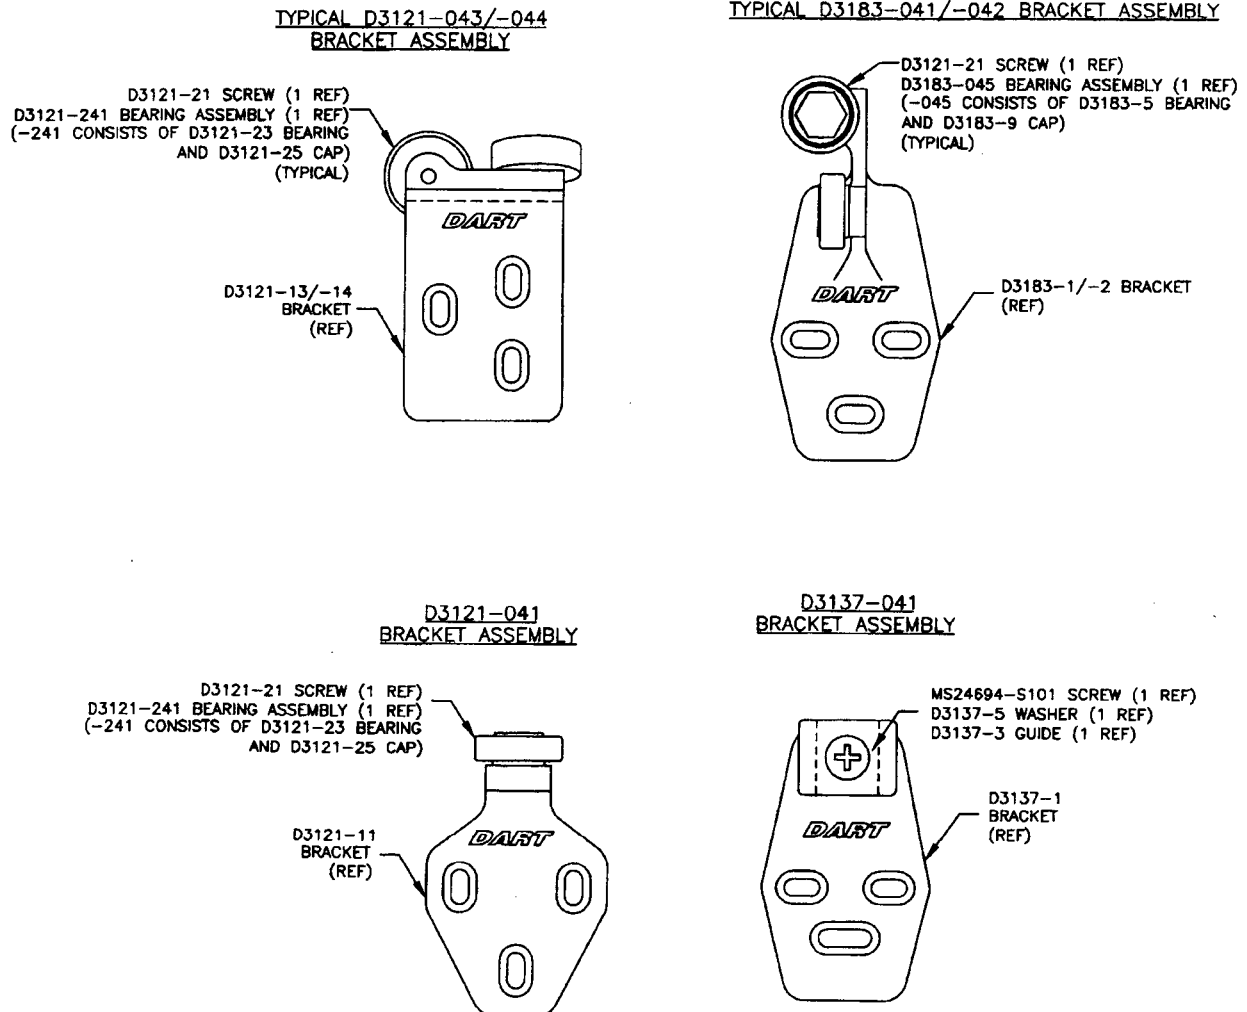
Replacement Parts, D412-694-01/-02 Door Assembly
